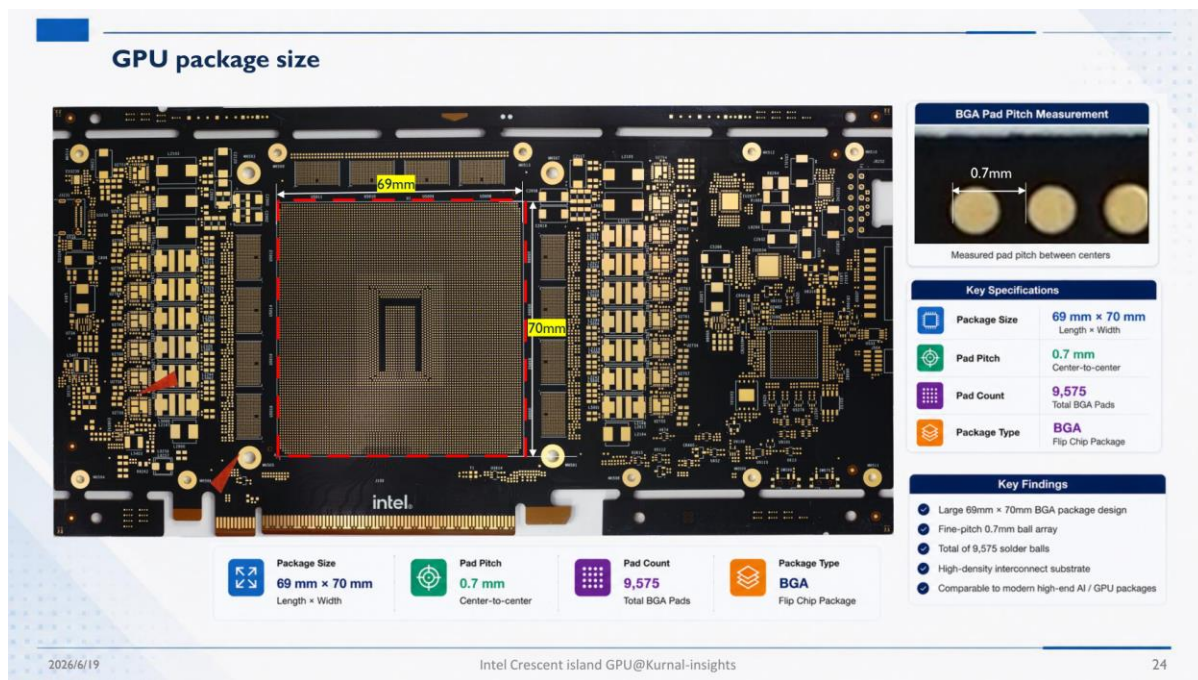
GPU package – 69 mm × 70 mm flip-chip BGA with 0.7 mm pad pitch.
